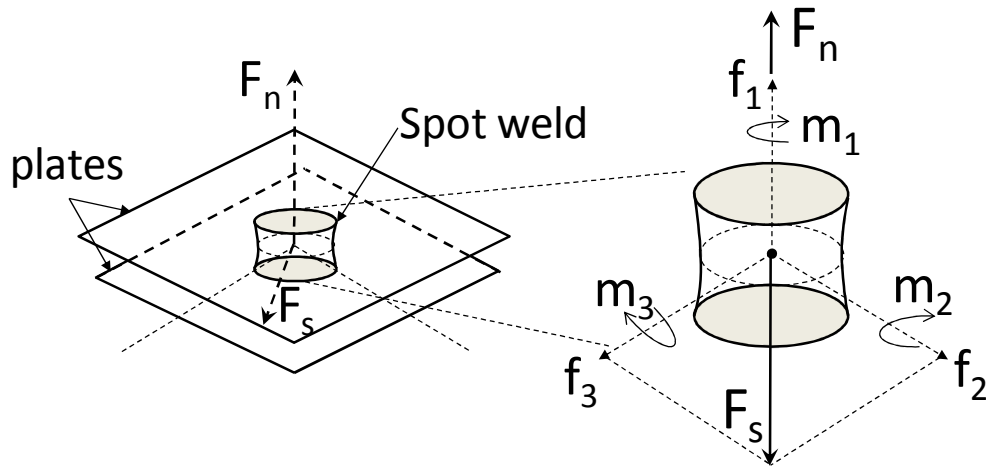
Connector element modeling a spot weld (modified from [87])
